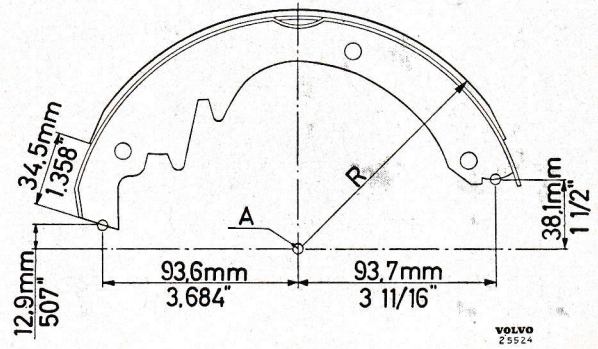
Adjusting measurements for brake shoe, rear wheel.
